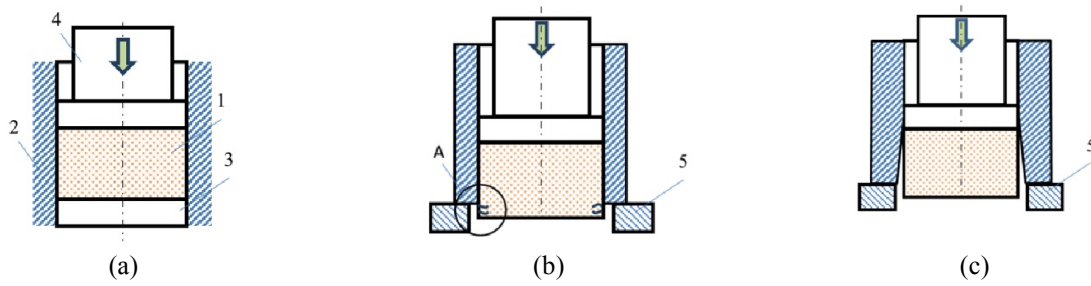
Scheme of granular medium pressing in a container with a cylindrical cavity (a), the appearance of slip cracks in the pressing operation (b), and a variant of pressing out through a conical cavity (c): 1 – the workpiece; 2 – the cavity, 3 – the spacer; 4 – the punch; 5 – the support ring
